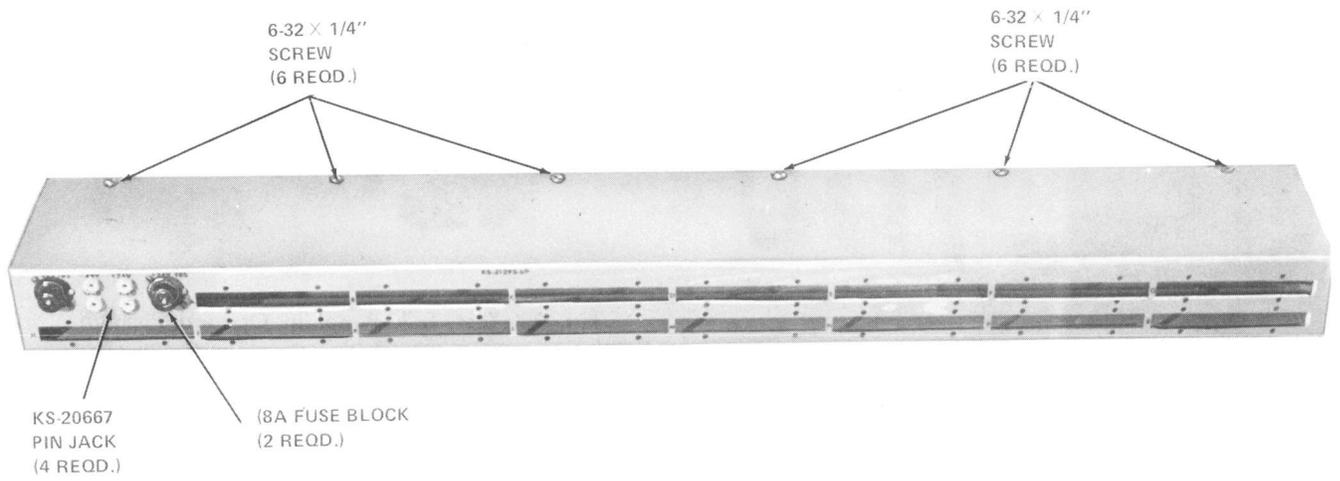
KS-21395-L5; ED-6C110-10, G65 Test/Talk Panel for Guard Rail Mounting
